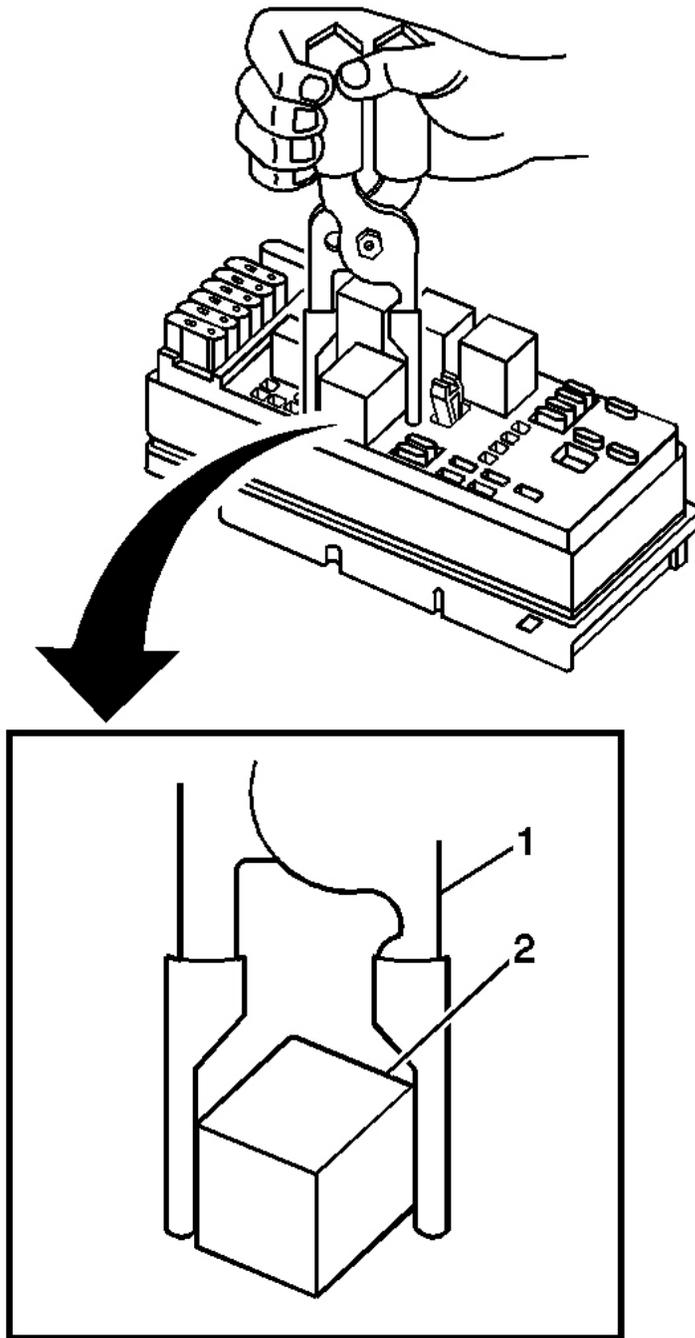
Removing/Installing Cooling Fan Relay Using J 43244
